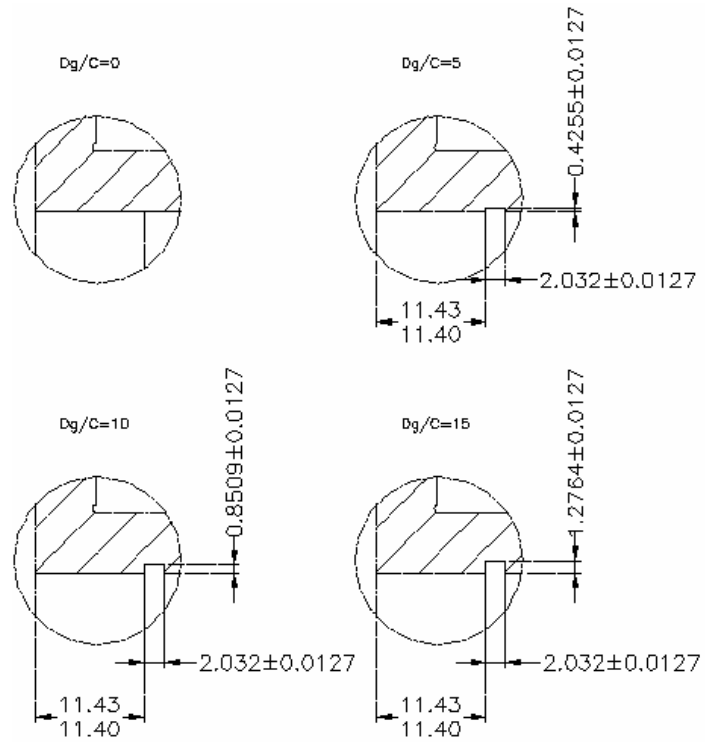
Groove detailed dimensions for seals to be tested (all dimensions in millimeters)
